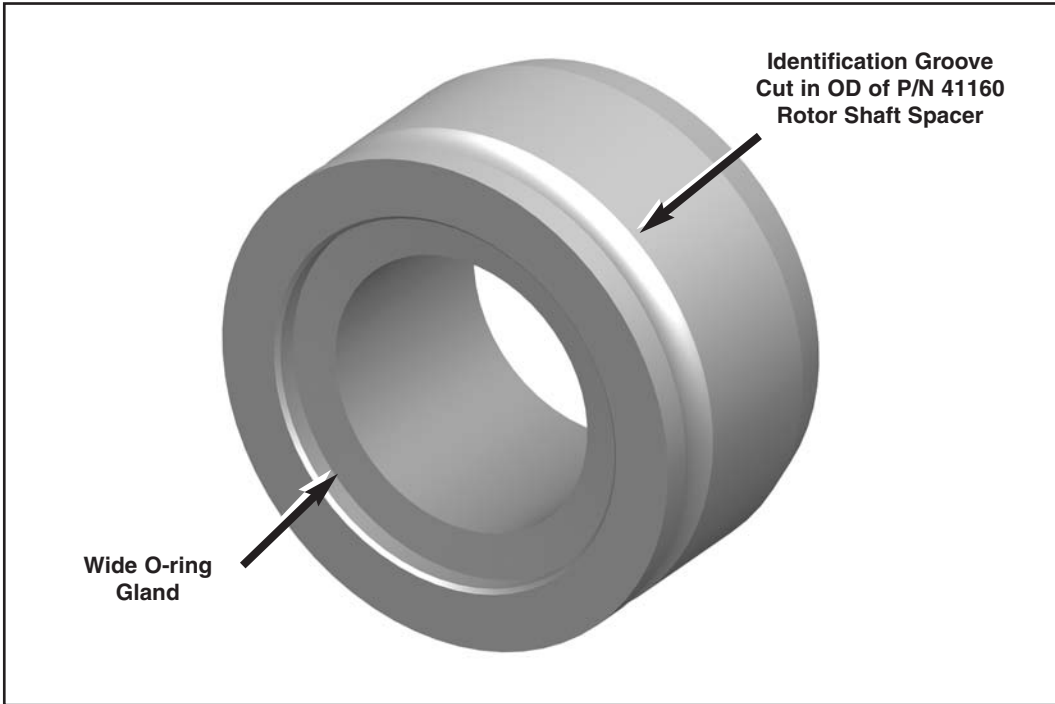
P/N 41160 Alternator Rotor Shaft Spacer Identification (identification groove and wide O-ring Gland)
